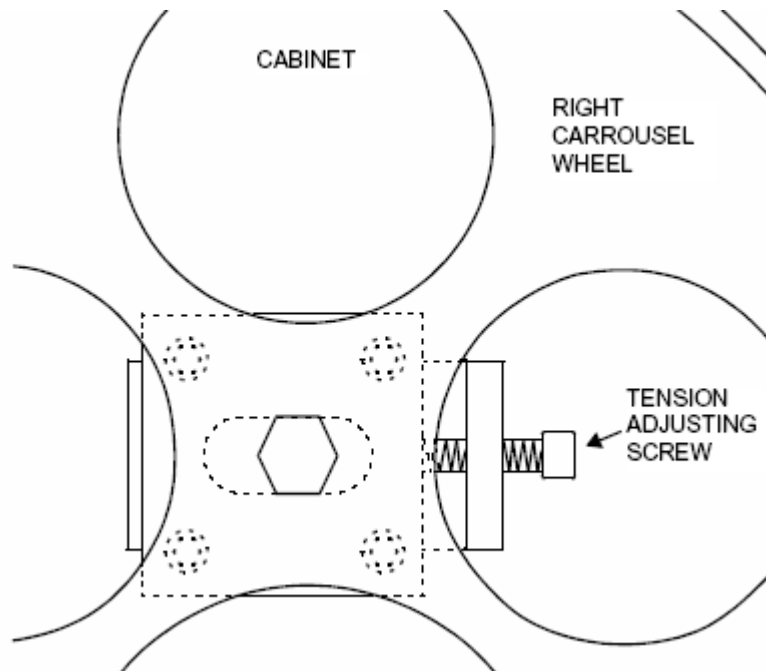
Top View of the Right Wheel and Tension Adjusting Mechanism.
